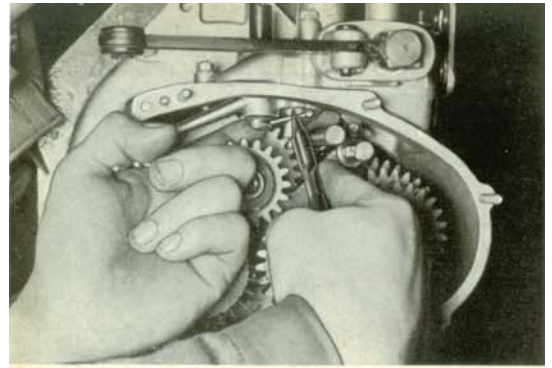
12. When removing top cover draw reverse fulcrum lever situated at the inner side of top cover downwards.
